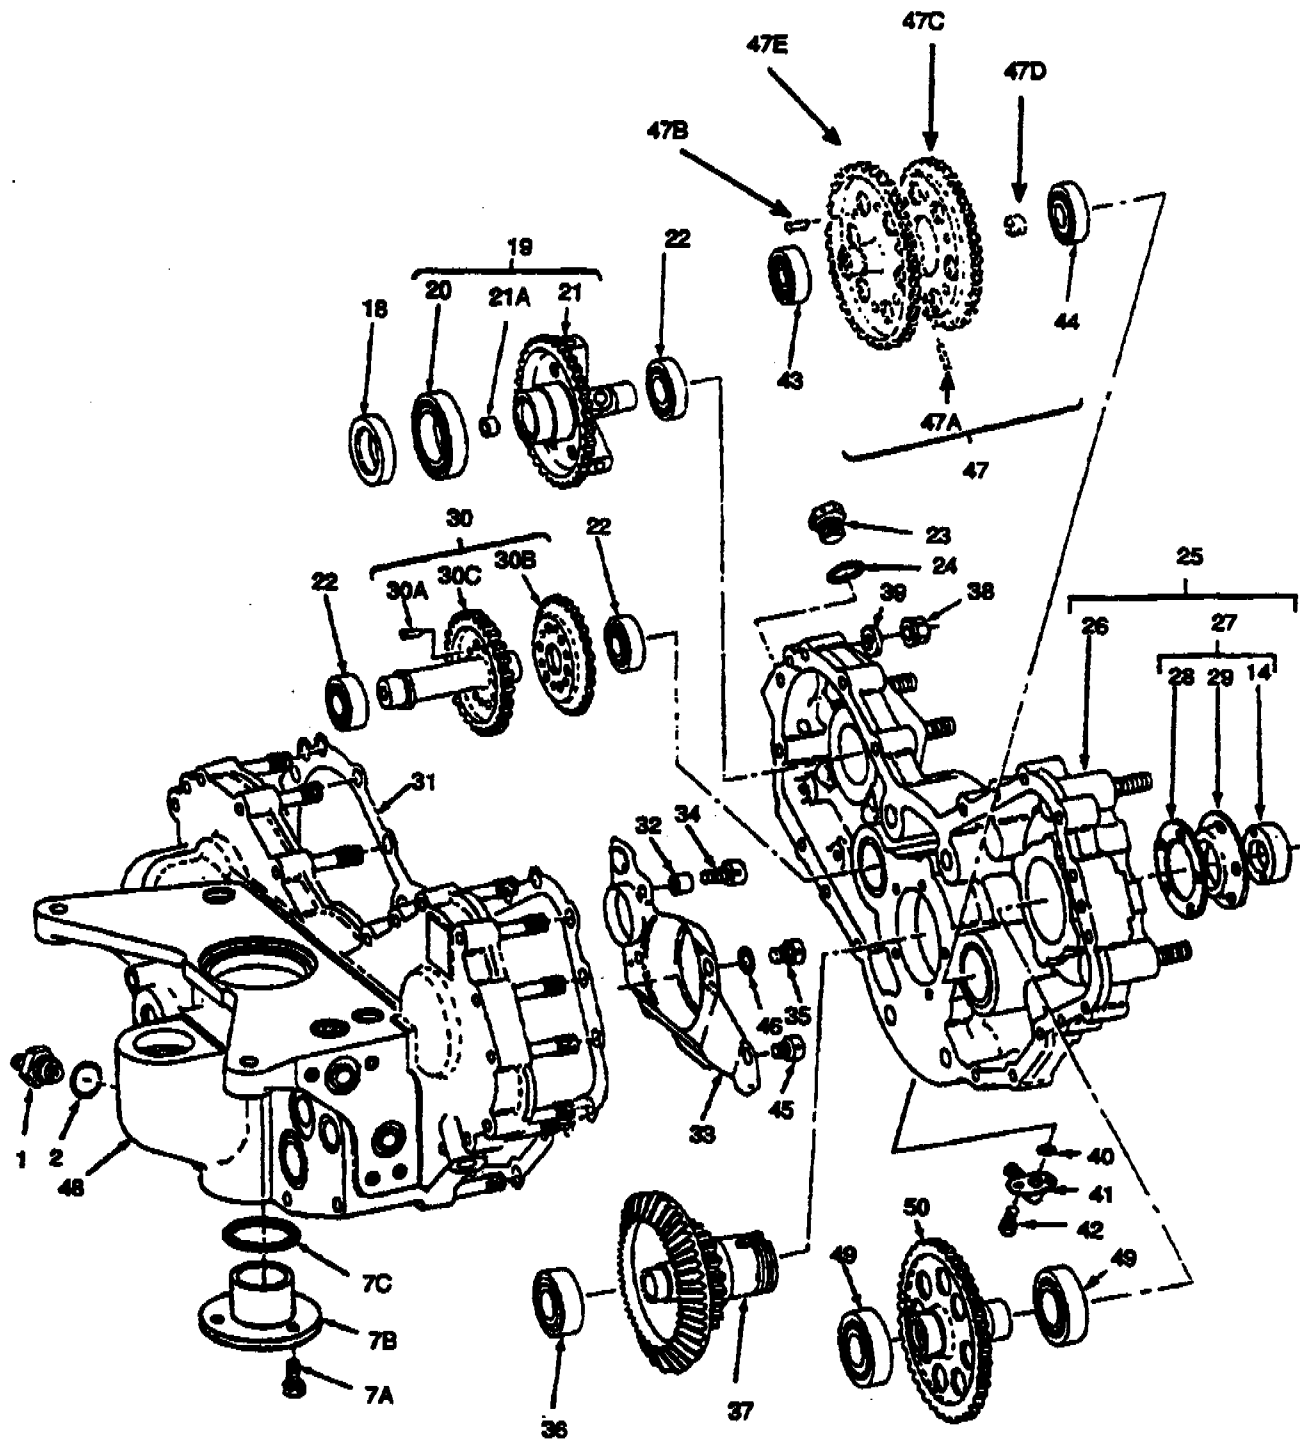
Accessory Drive Gearbox (Sheet 2 of 2).
